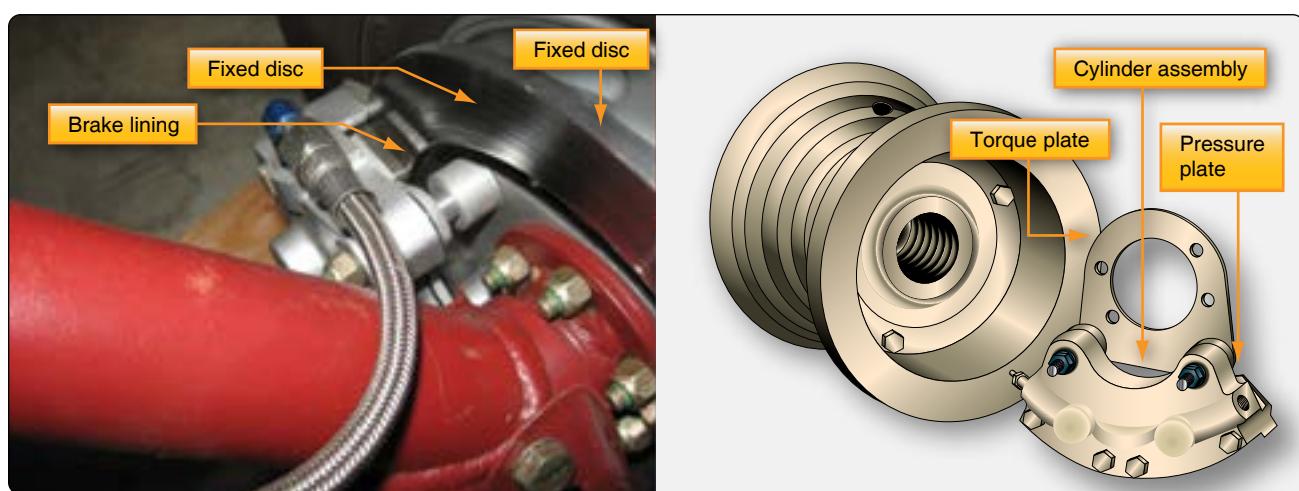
A Cleveland brake on a light aircraft is a fixed-disc brake. It allows the brake caliper to move laterally on anchor bolts to deliver even pressure to each side of the brake disc.
